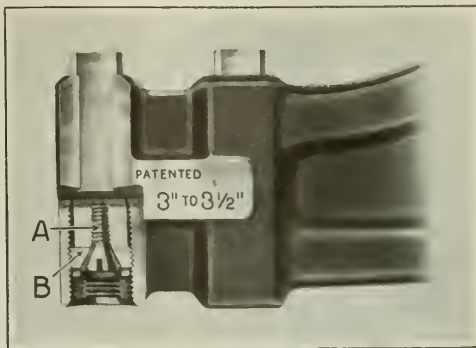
View showing Arrangement for adjusting and locking Measuring Pins
